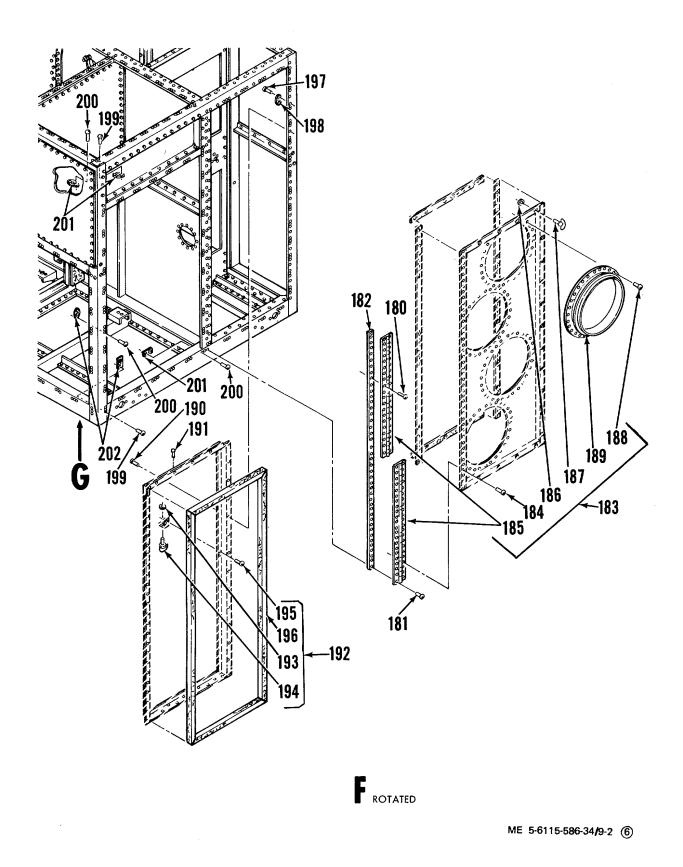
Shell assembly, exploded view. (sheet 6 of 9)
